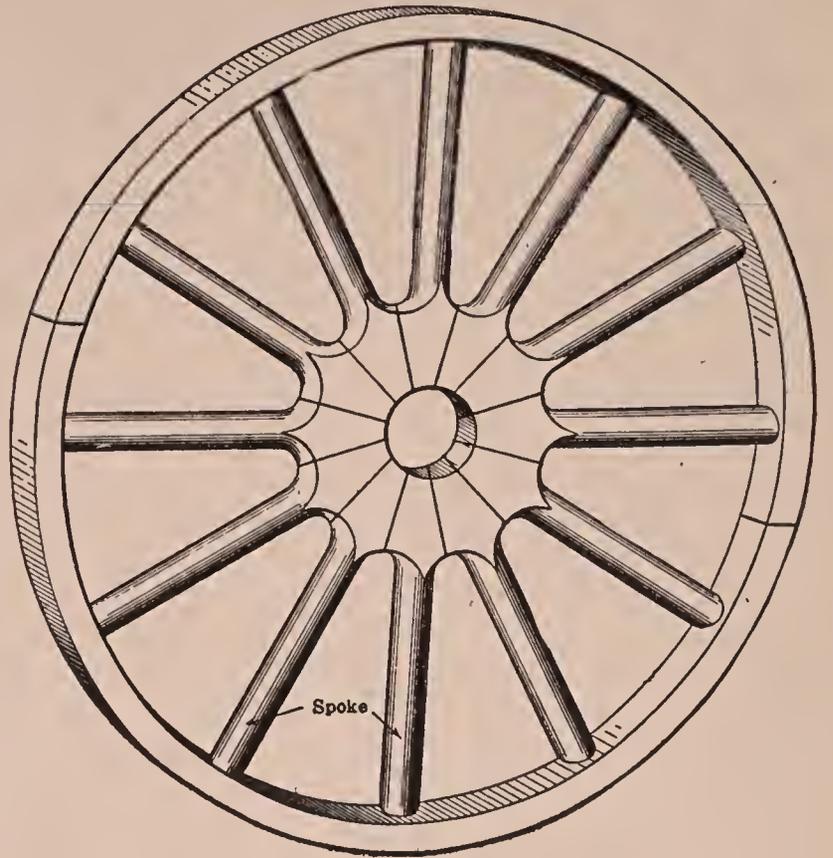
Typical American Artillery Type of Wood Wheel, as Used for Motor Cars, Shown Before the Band Is Shrunk on the Outer Circumference or the Hub or Hub Flange Bolted in Place.
